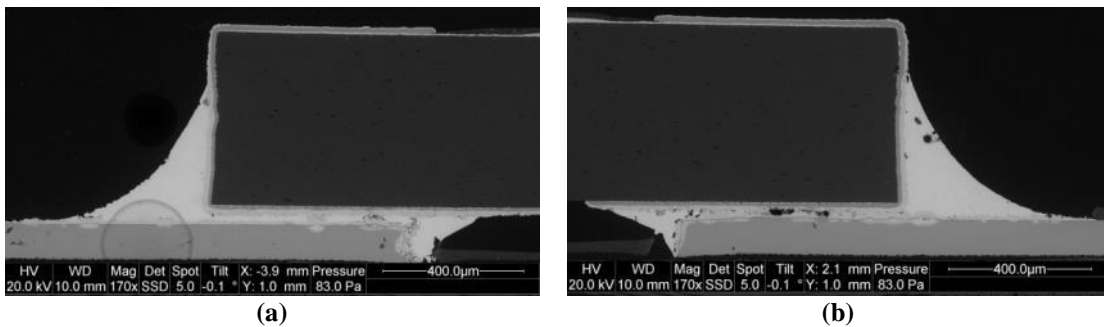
R2512 – SAC305 (a) Left Solder Joint (b) Right Solder Joint after 1000 hours/200°C Aging
